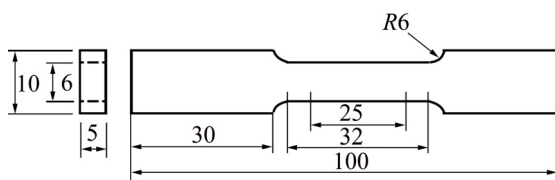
Schematic view of tensile test specimen (unit: mm)
